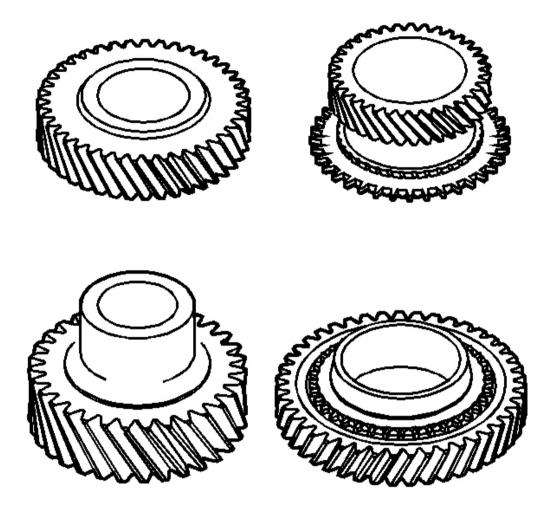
Inspecting Gear Teeth & Gear Splines For Damage Courtesy of GENERAL MOTORS CORP.
